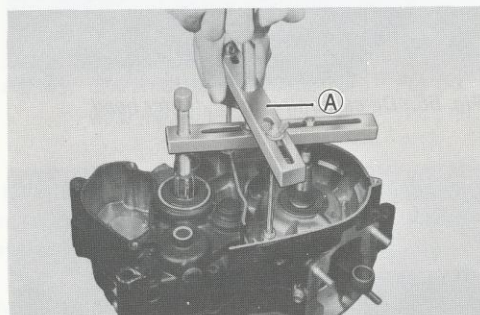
Detach crankcase by using special tool (A) (09910-80113).
